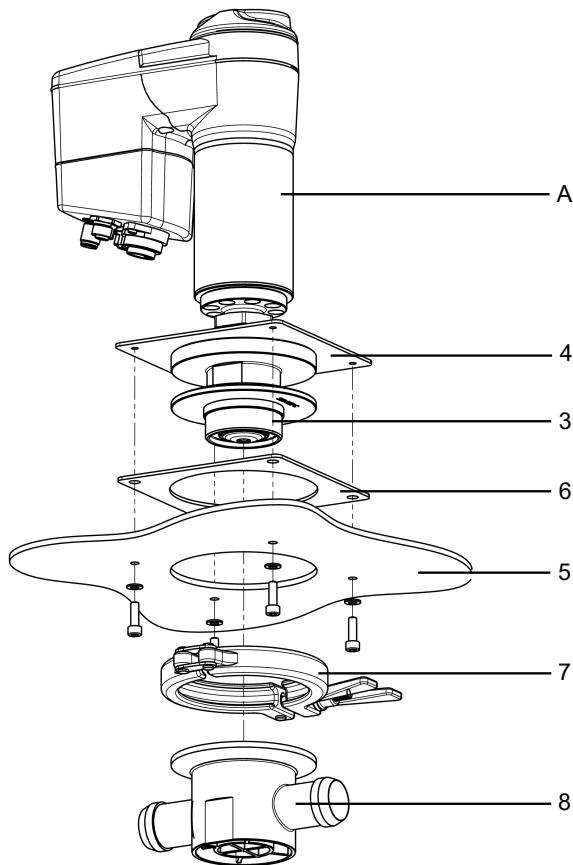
Assembling the pneumatic stainless steel actuator in the housing
